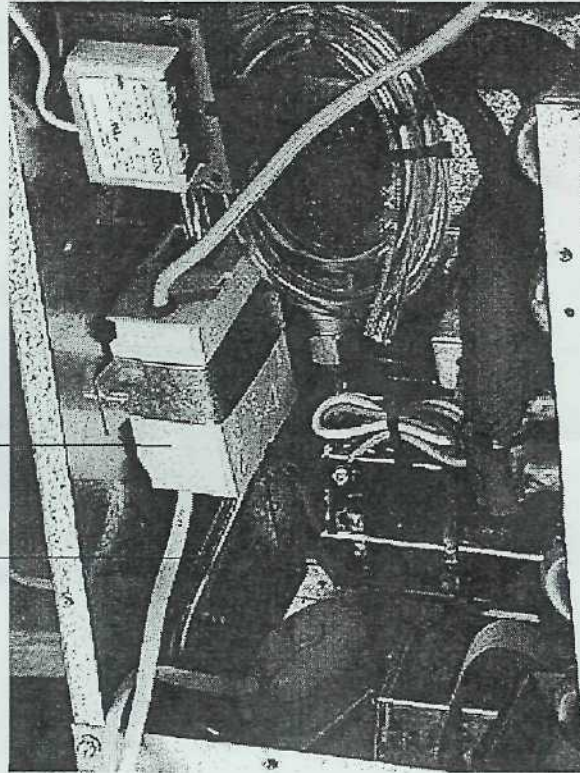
Fasten Pump Mounting Strap To Unit With Screws From Panel.
